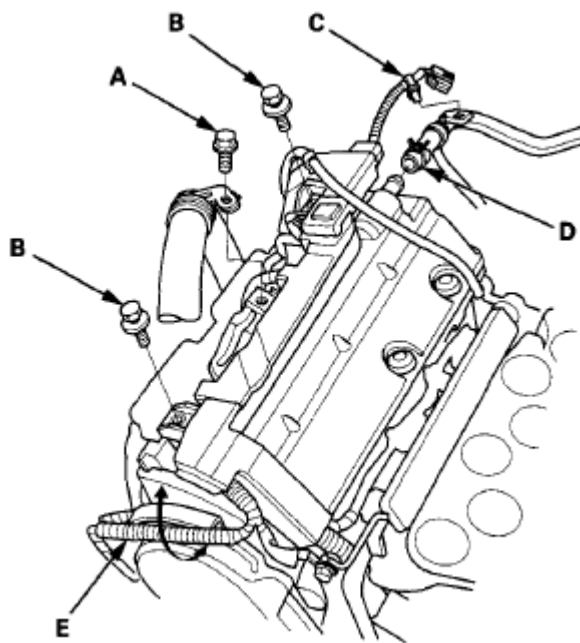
Removing Power Steering Hose Clamp Mounting Bolt
